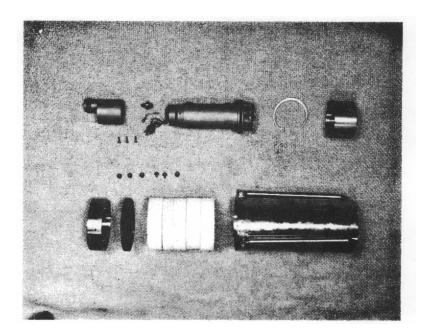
Exploded views - microbarograph sensing head (Wiancko 3-PMB-2)
